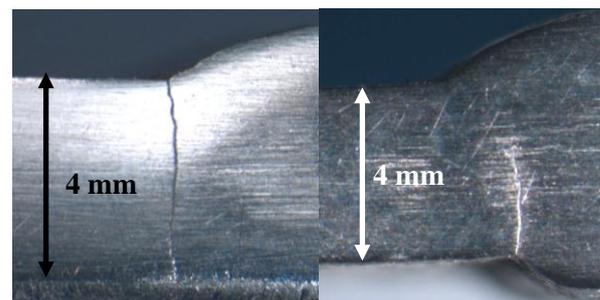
Fatigue cracks at the toe (left) and at the root (right)
